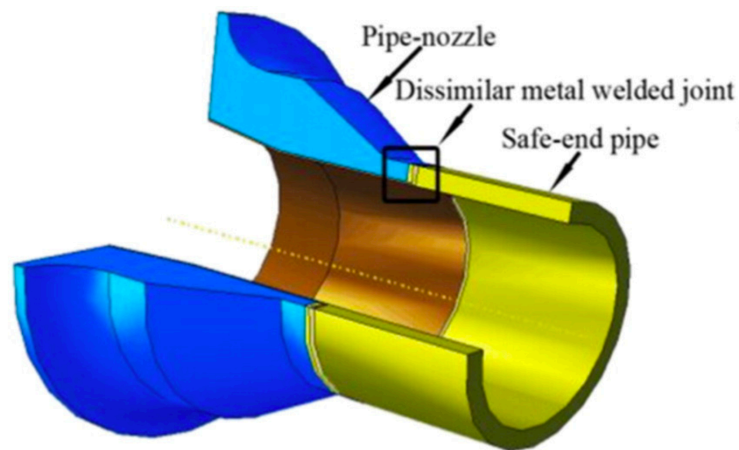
Ferritic steel pipe nozzle joined with austenitic stainless steel end in a pressure vessel part [3].
